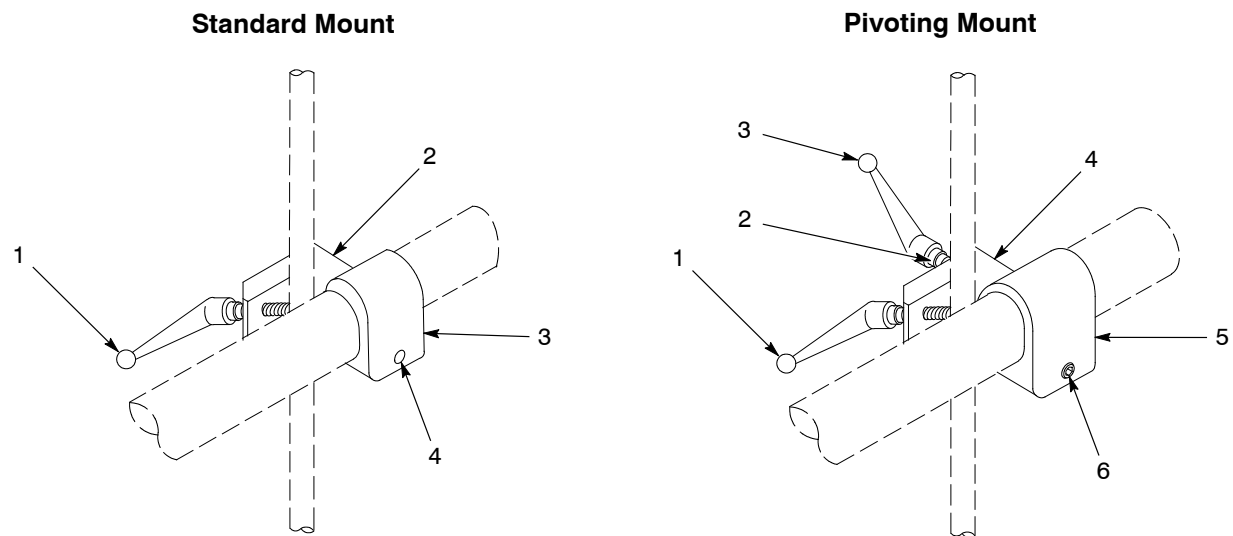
Spray Gun Bar Mounts for Tube-Mount Spray Guns
